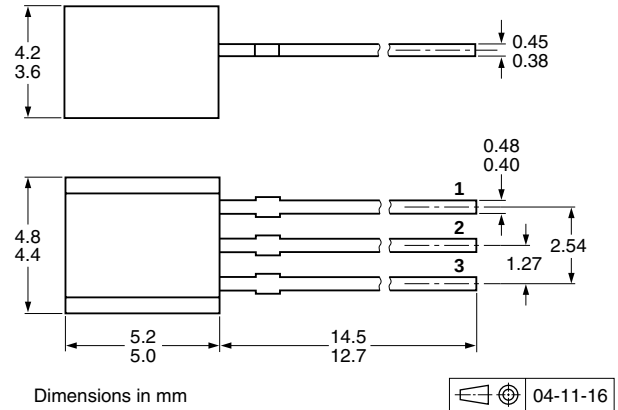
Package outline SOT54 (SC-43A/TO-92)
